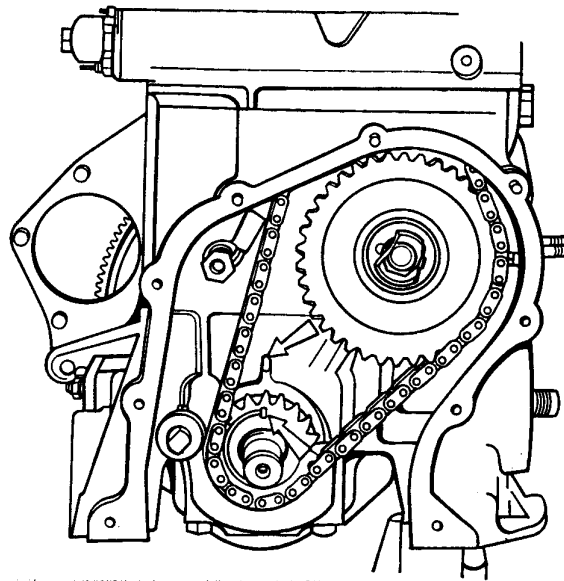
Alignment of Timing Marks on Crankshaft Sprocket and on Cylinder Block
